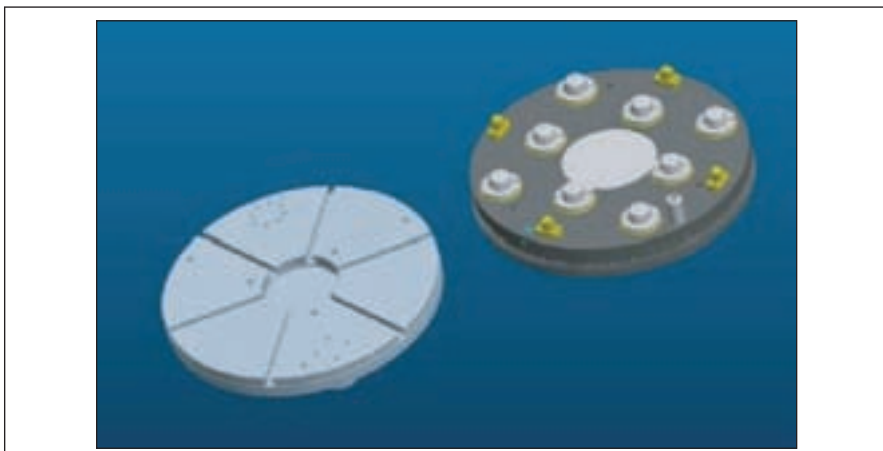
Zero-point clamping pallet to reduce setup time in the machine.
